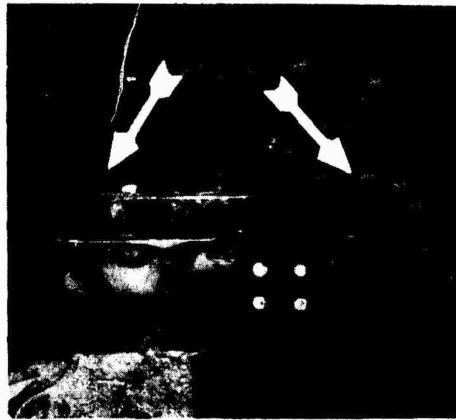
Arrows Show 2-1/2-Inch Rips In Right Front Side Panel at the Fuel-Carrying Bracket Top Mounting Bolts On M718 after 4320 Test Miles. The M151A1C Left Side Panel Developed Similar Crack after 833 Test Miles.
